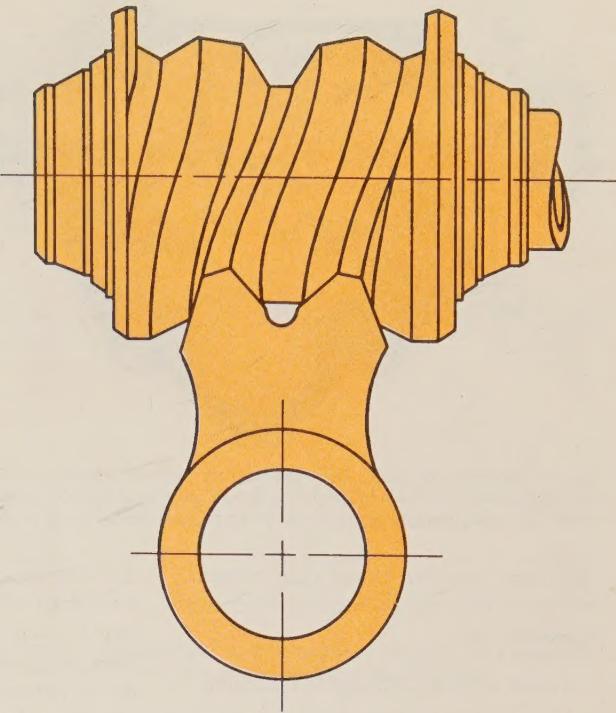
Saginaw's worm-and-sector gear used an hourglass worm. The helix angle of the worm was considerably greater than in worm and worm-wheel gears with a consequent increase in efficiency.
